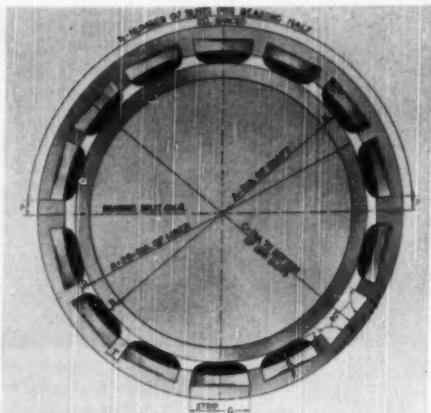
CROSS SECTION OF SEGMENTAL-TYPE RUBBER BEARING
